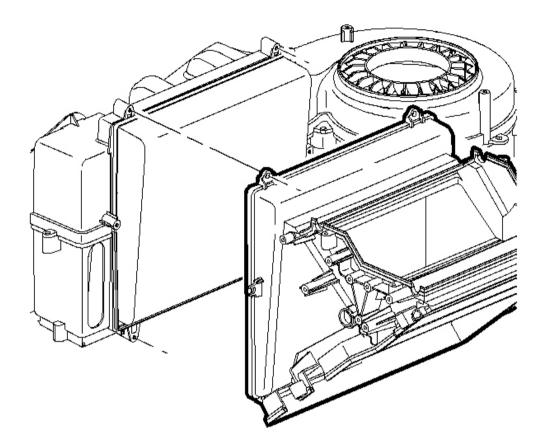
Heater Core Pipe Cover Courtesy of GENERAL MOTORS CORP.
